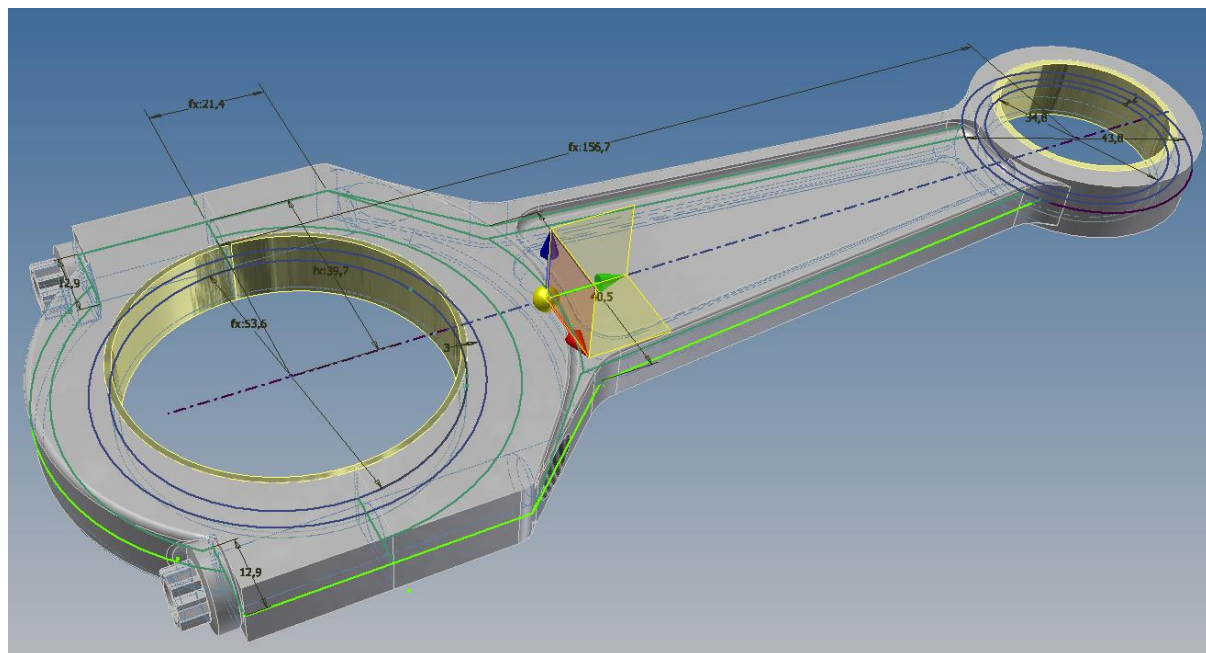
DIMENSIONED CONNECTING ROD WITH CENTER OF GRAVITY AND INSERTED BEARING SHELLS
